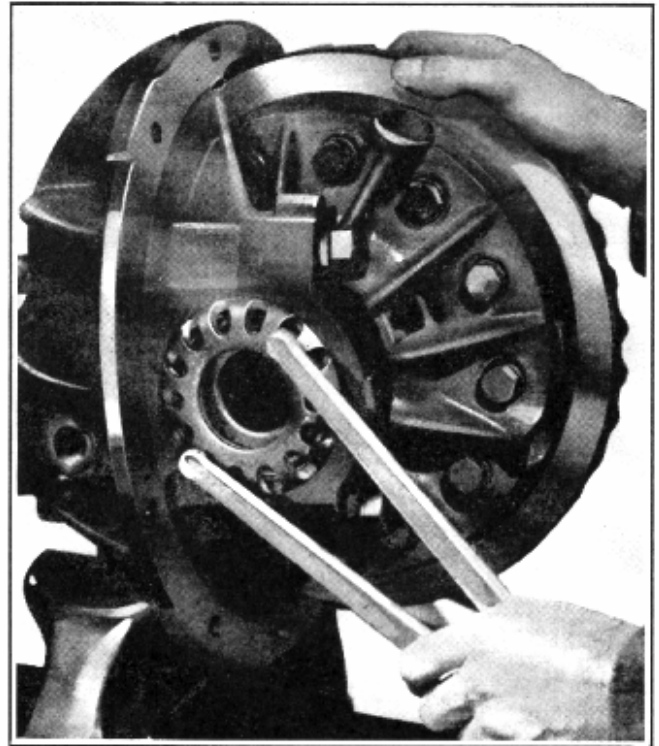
Adjusting Ring Gear and Pinion Backlash
